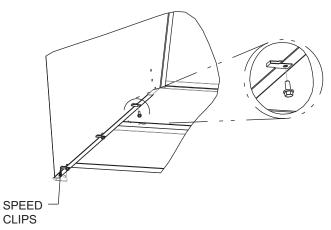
Bottom Filters Installed with Flange Pointing Down
